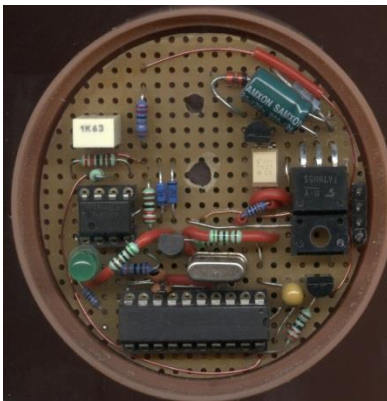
View of the sensor circuit board (PCB) with microprocessor AT89C2051
